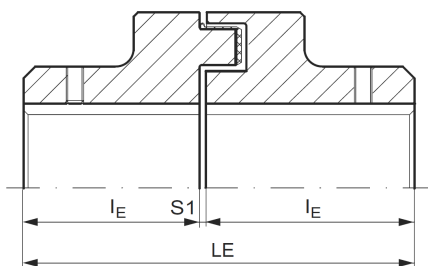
Mounting dimensions of the Nor-Mex E coupling
